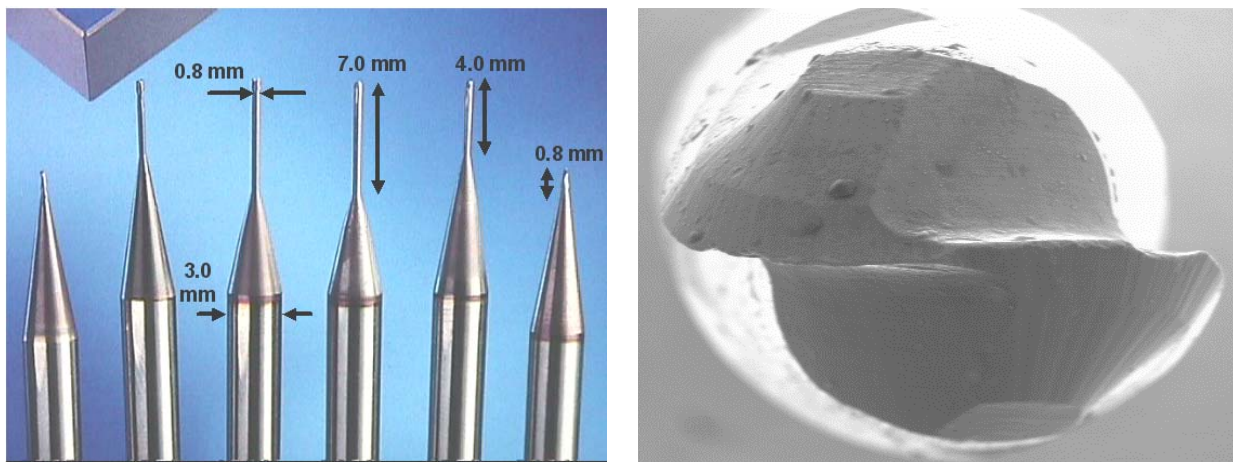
Miniature Ball End Mills on left with close-up of ball end on right
